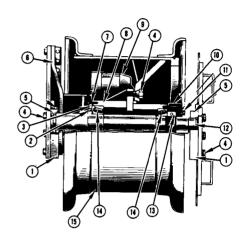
WHEEL AND AXLE ASSEMBLY
